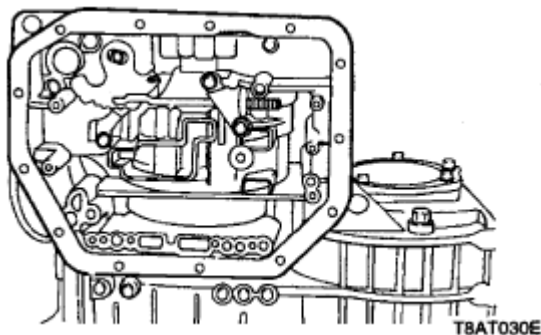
Identifying Detent Spring Assembly & Sprag Rod Support
